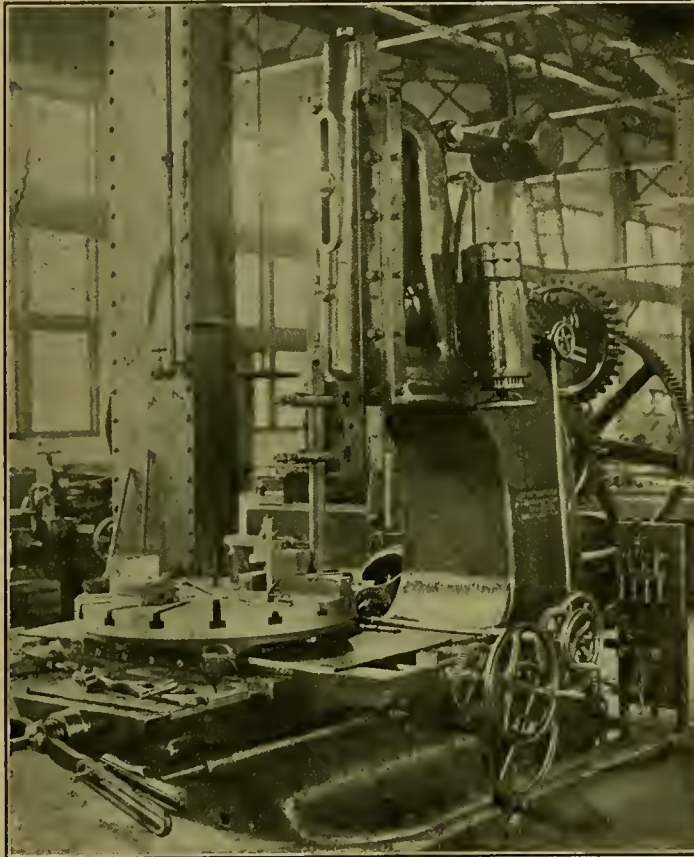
VIEW OF THE 19-IN. PUTNAM SLOTTER, SHOWING ARRANGEMENT OF CONTROLLER, TABLE BOARD, ETC.
